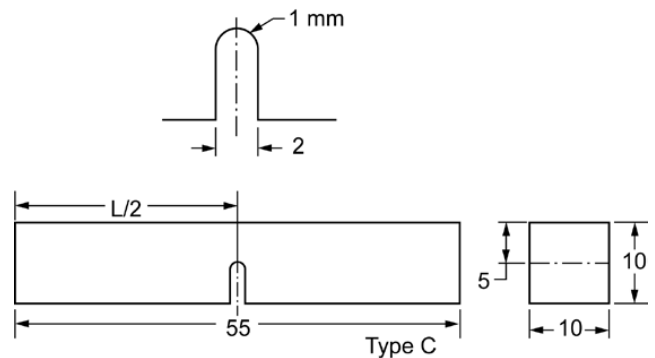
Schematic of Charpy U-notch specimen used in this investigation.
